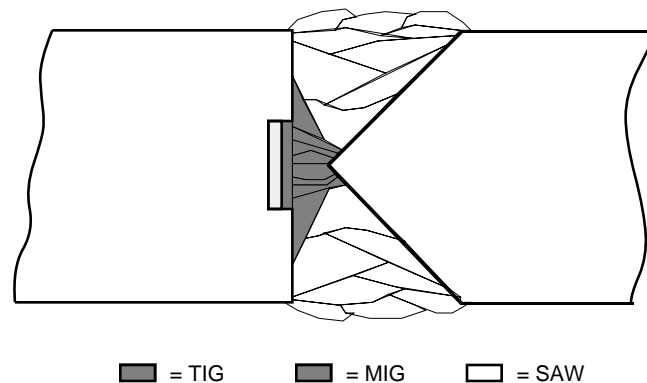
Detail of the modified double bevel weld preparation used to simulate a lack of fusion weld defect.
